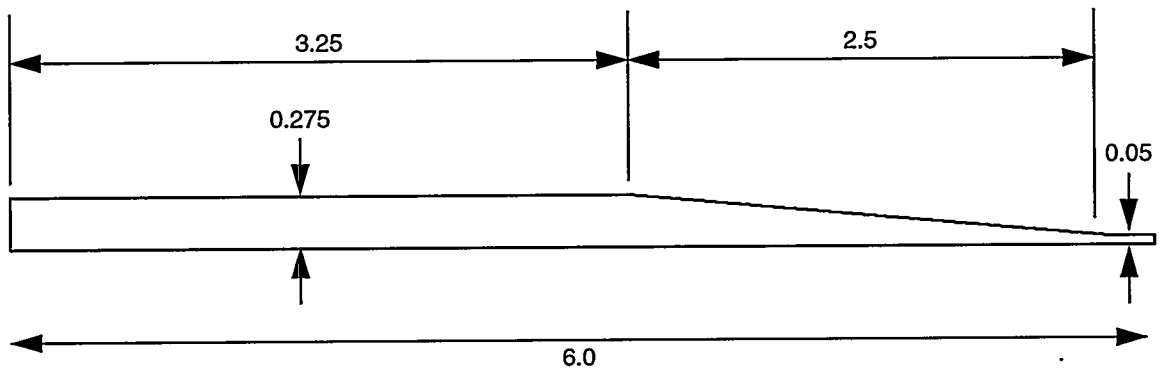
Tapered Adherend Geometry - Compressive Specimen (Cross Section, Dimension in Inches)
